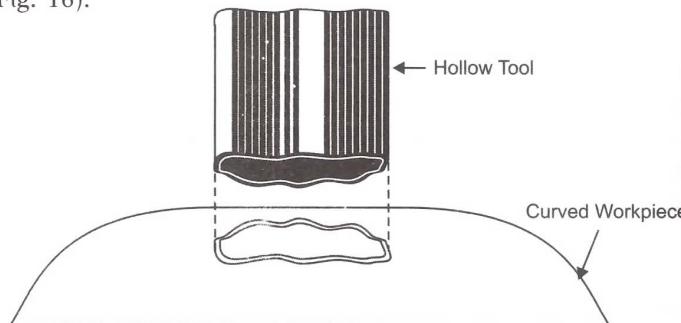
Electro-chemical Machining of Irregular Shaped Holes
